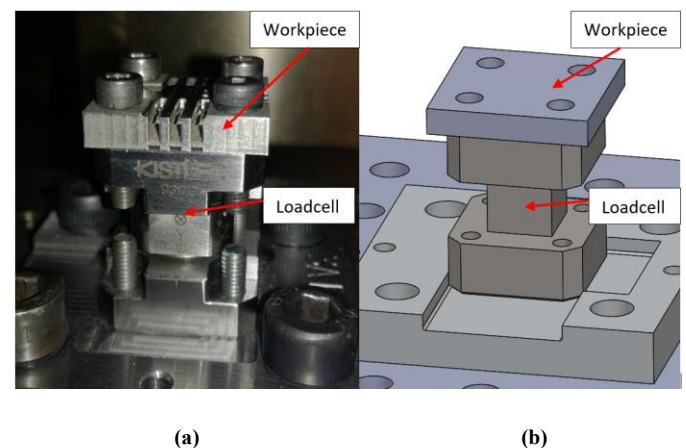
(a) Inconel 625 workpiece mounted on the loadcell; (b) 3D CAD of the sample
